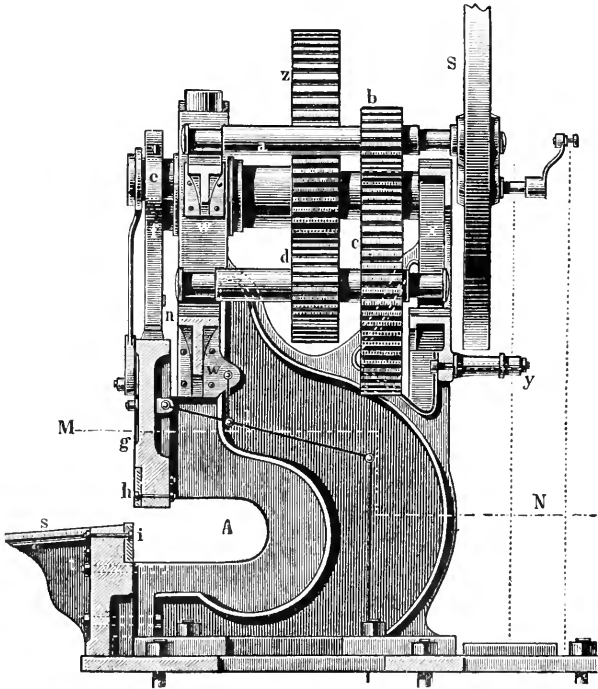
END VIEW AND TRANSVERSE SECTION OF BOILER-PLATE SHEARS.
